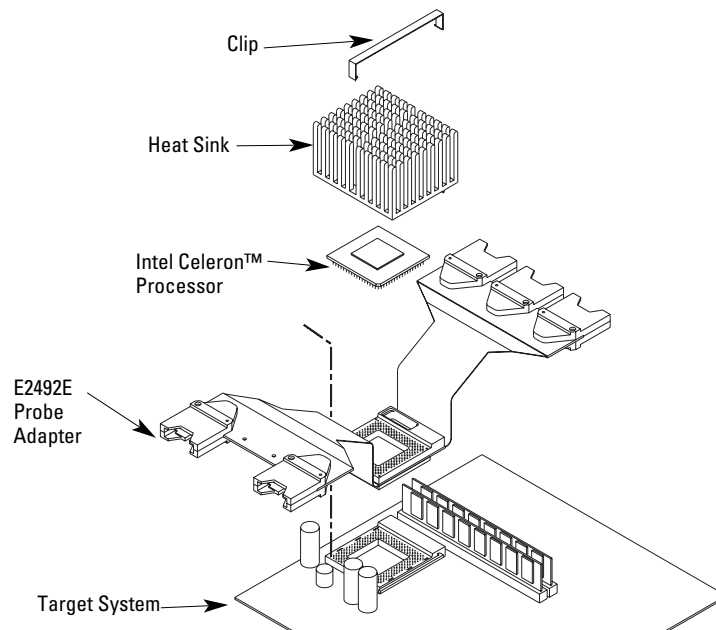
Installation View of E2492E 370 Pin PGA Probe Adapter Dimensions
